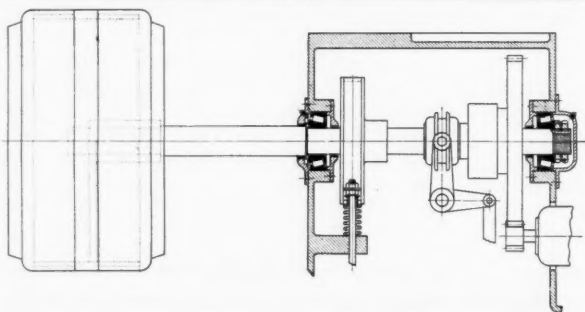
Mounting Used on Main Shaft of a Drum Tire Building Machine, Designed Especially with a View to Shaft Rigidity and to Carry the Overhanging Load of the Drum.
